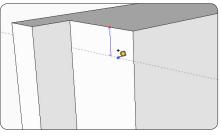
Placing a Parallel Guide Line to locate the top edge of a stopped groove on the face of the piece.
